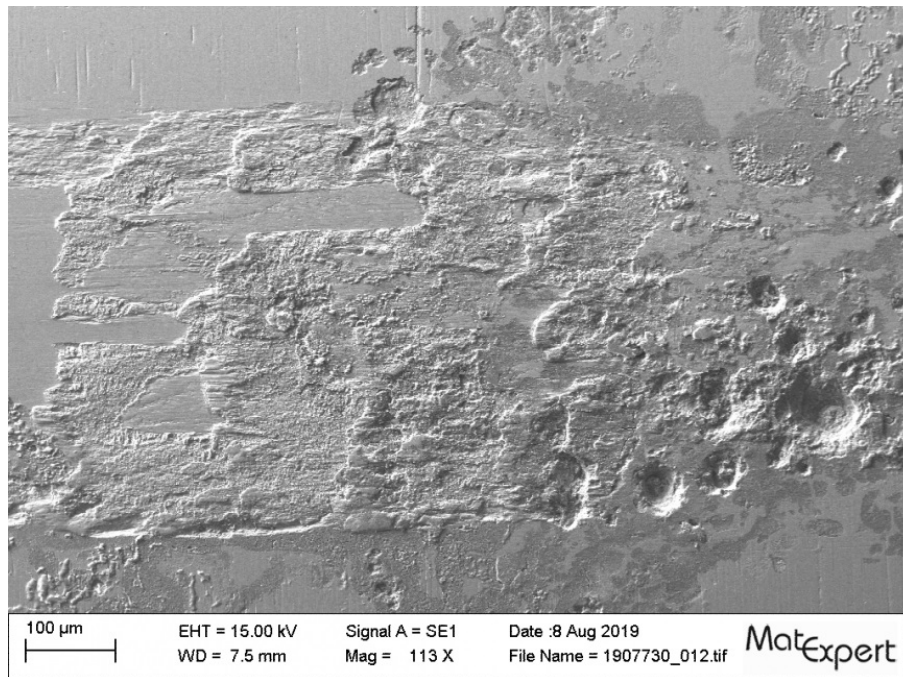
Bearing no. 3, cylindrical roller – pitting and corrosion.
